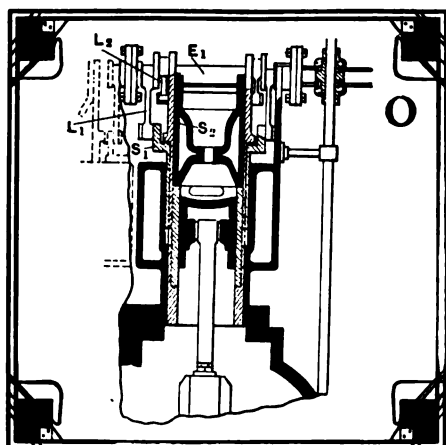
Fig. O.—Longitudinal sectional view of the McIntosh motor in which the two sleeves are operated from an overhead eccentric shaft
